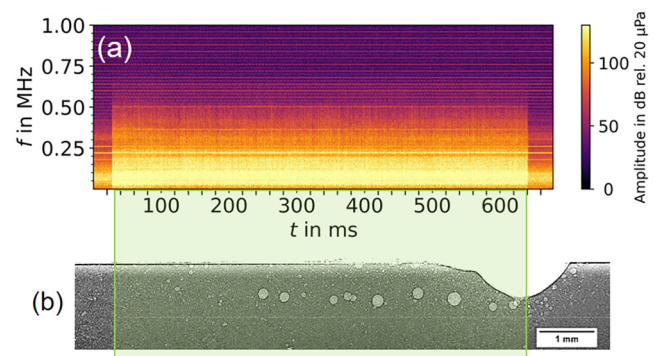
Sequence of re-welding process with degassing of pores by expanded capillary.
